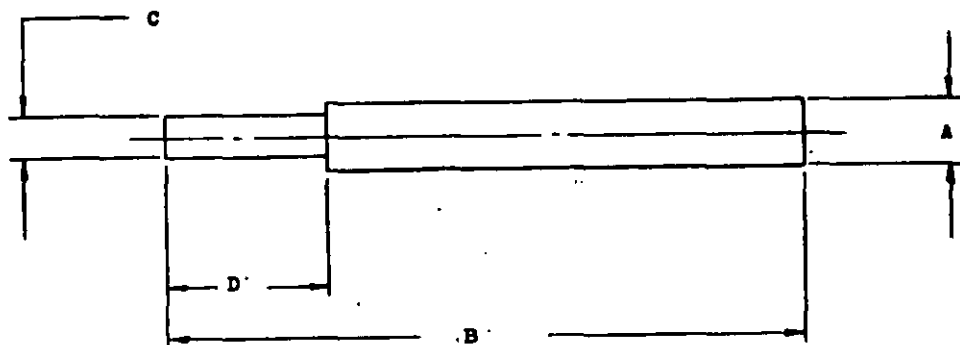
Type IV, class 3, tang break-off tool for Unified Coarse and Fine thread sizes 1/2(.500) and smaller.
